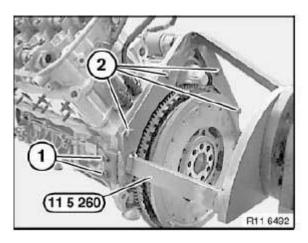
Identifying Special Tool 11 5 260 And Screws
